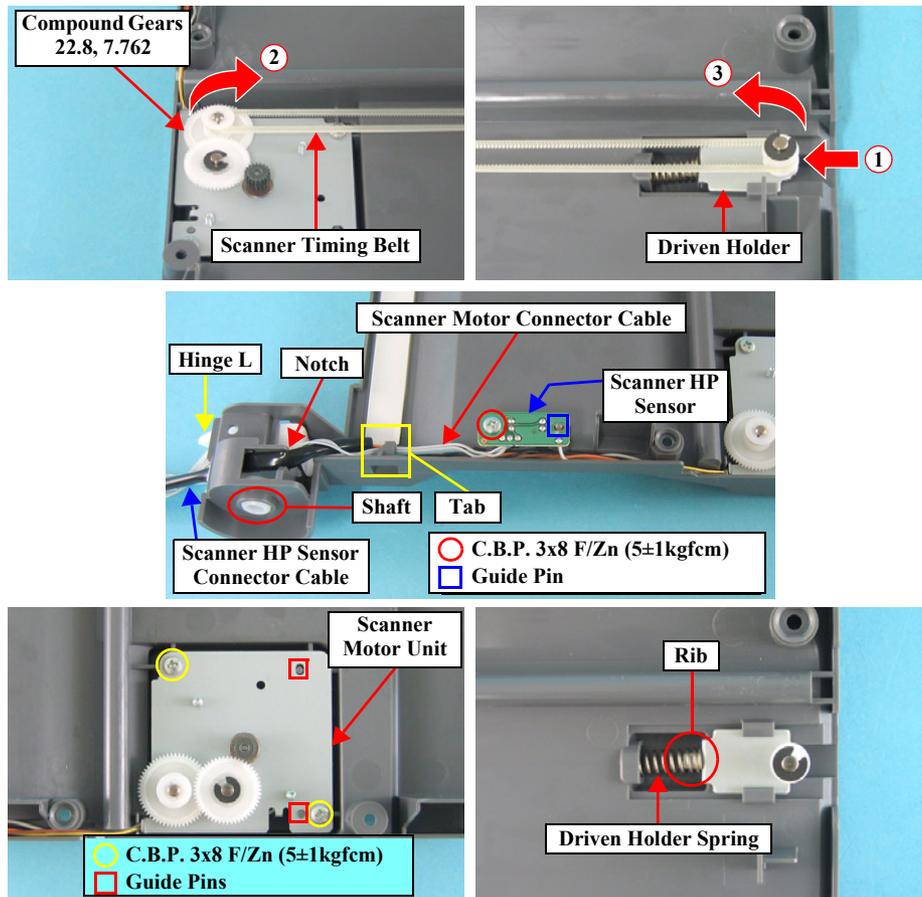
Removing Scanner Motor Unit/Scanner HP Sensor/Driven Holder
